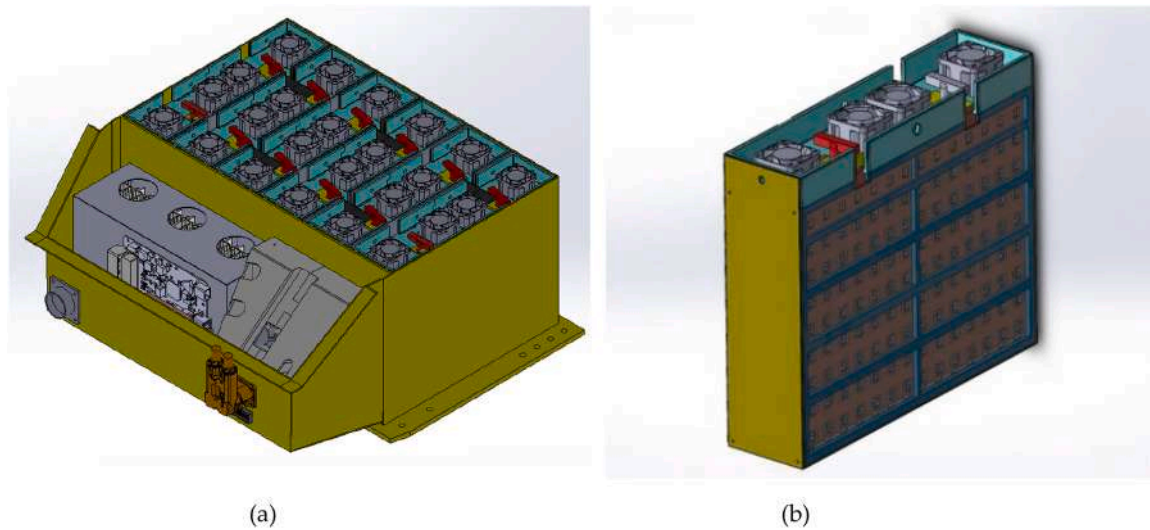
(a) Assembly of Battery Pack, (b) Assembly of Battery Module.
